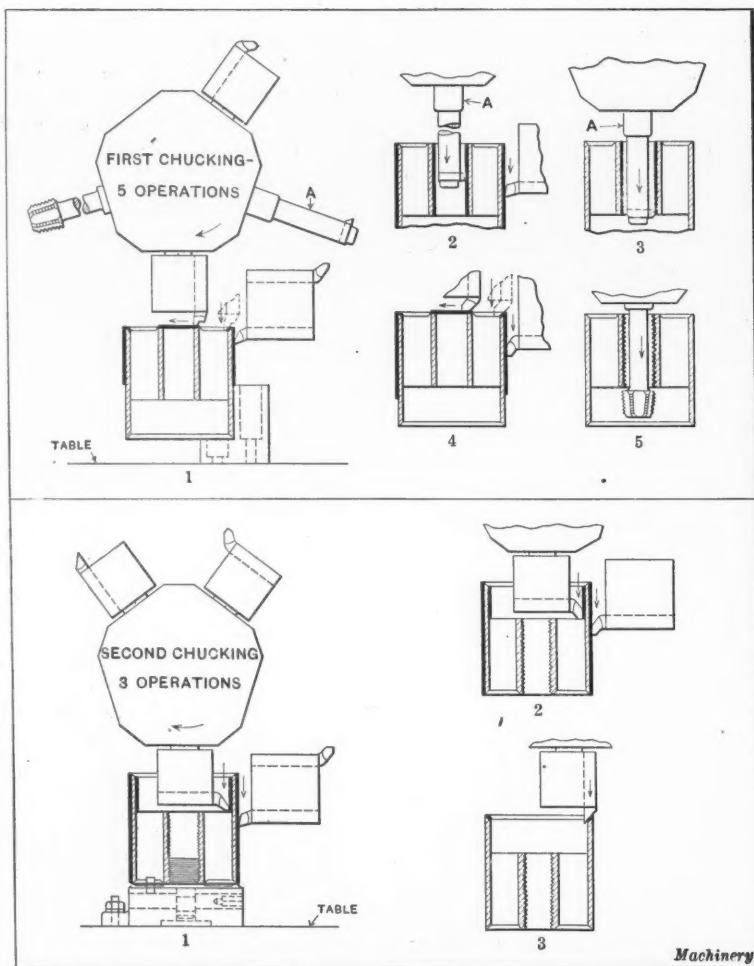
Tooling Lay-out for Pump Part shown in Fig. 16, illustrating One Method of machining Work that requires a Tapping Operation
